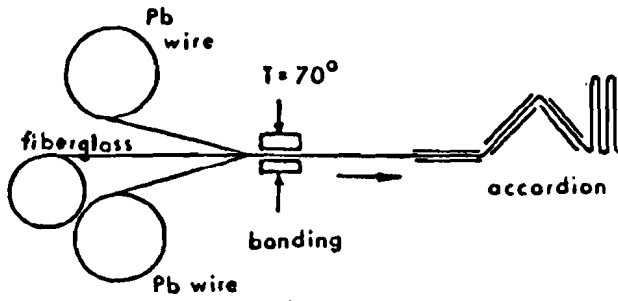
a) Outline of a prototype of the ribbon and "accordion" fabrication machine.
